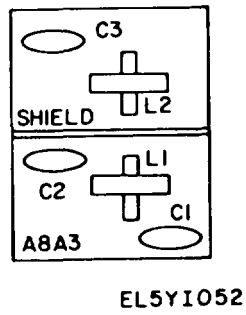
LOW PASS FILTER ASSEMBLY A8A3
